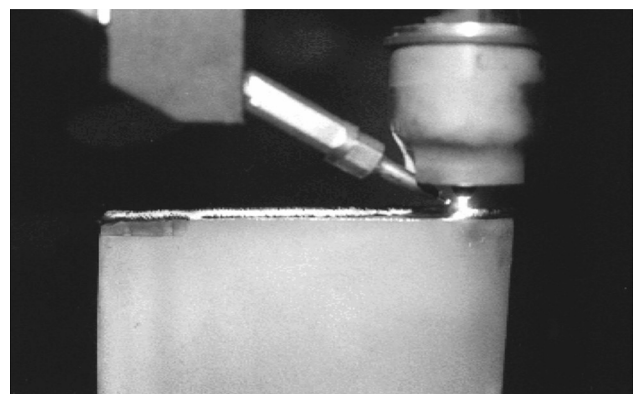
Weld repair of tip damage on a frame 7F first stage bucket. (Source: Liburdi Engineering.)
